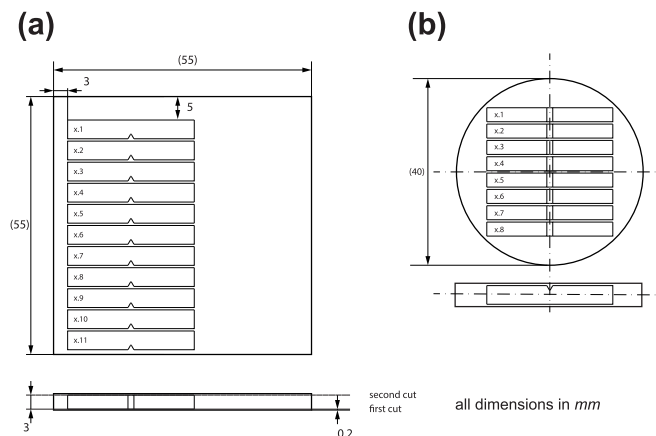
Cutting scheme of KLST type samples for (a) the L- W_f/W material and (b) for the S- W_f/W material. All dimensions are given in mm.
